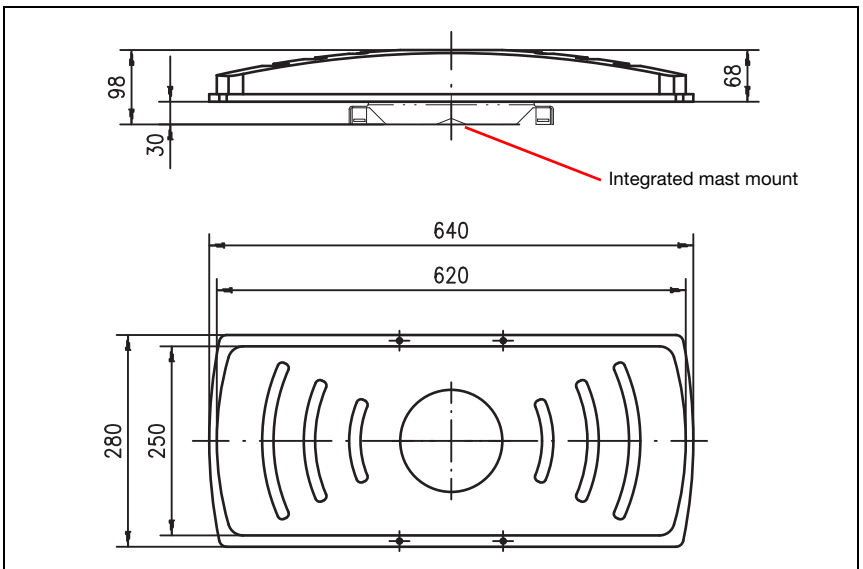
Dimensioned drawing of the RFU 81 SL 100-EU read/write system
